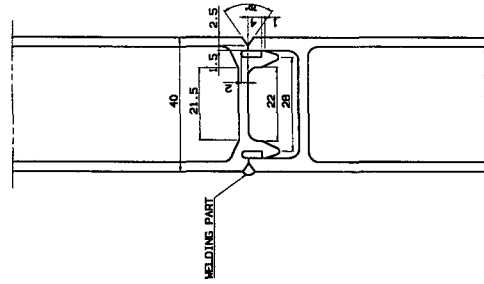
Typical welding joint of aluminum extrusion profile
